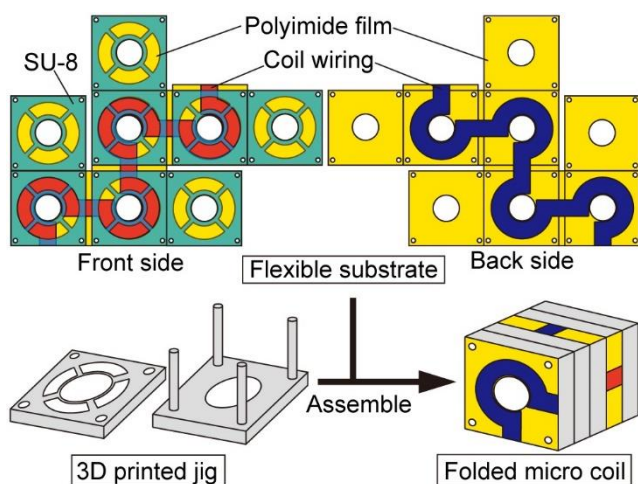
Concept of folded micro coil which assemble flexible substrate and 3D printed jigs
